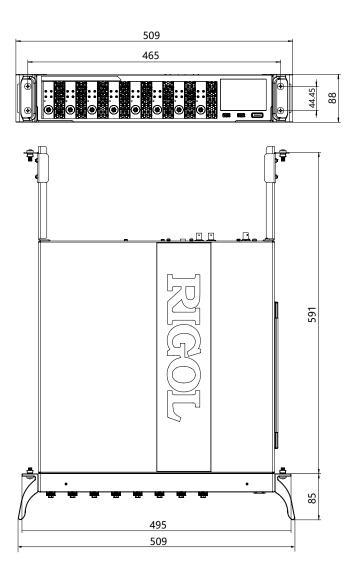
Dimensions of Rack-mounted Instrument (Unit: mm)
